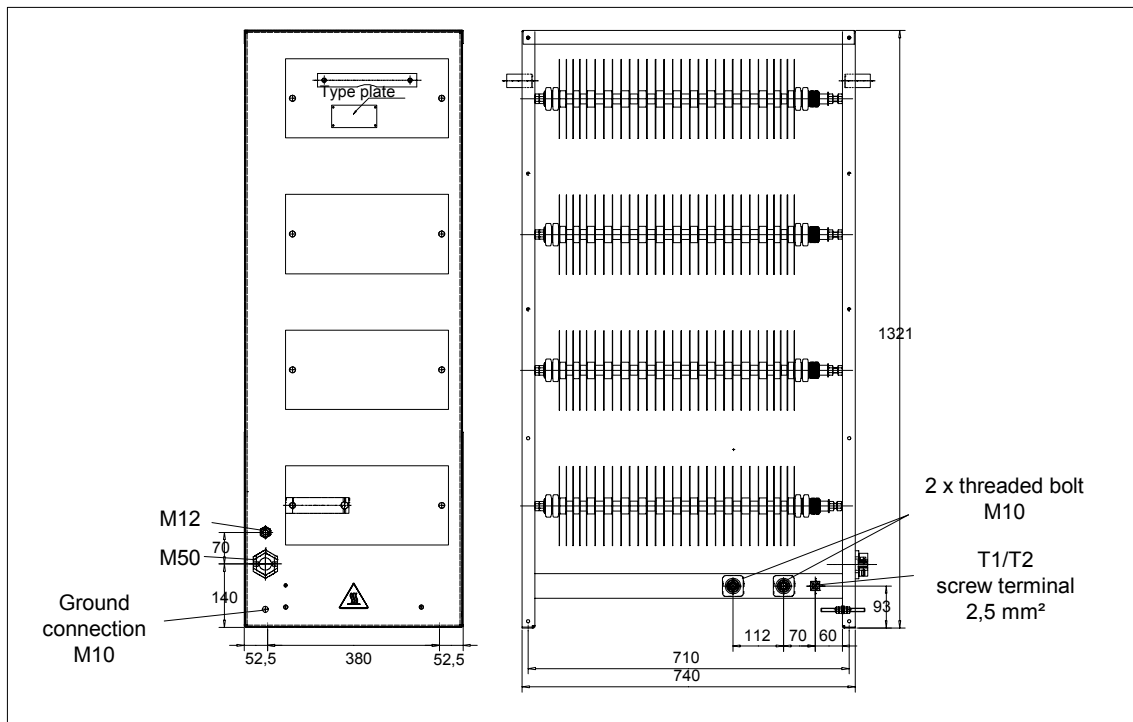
Dimension drawing of the braking resistor for option L62
